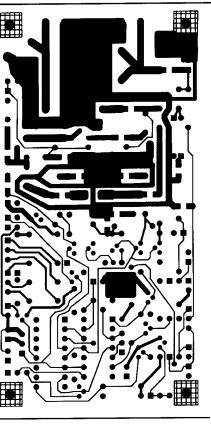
Bottom-layer printed-circuit board pattern. (Note: Board requires plated-through holes.)
